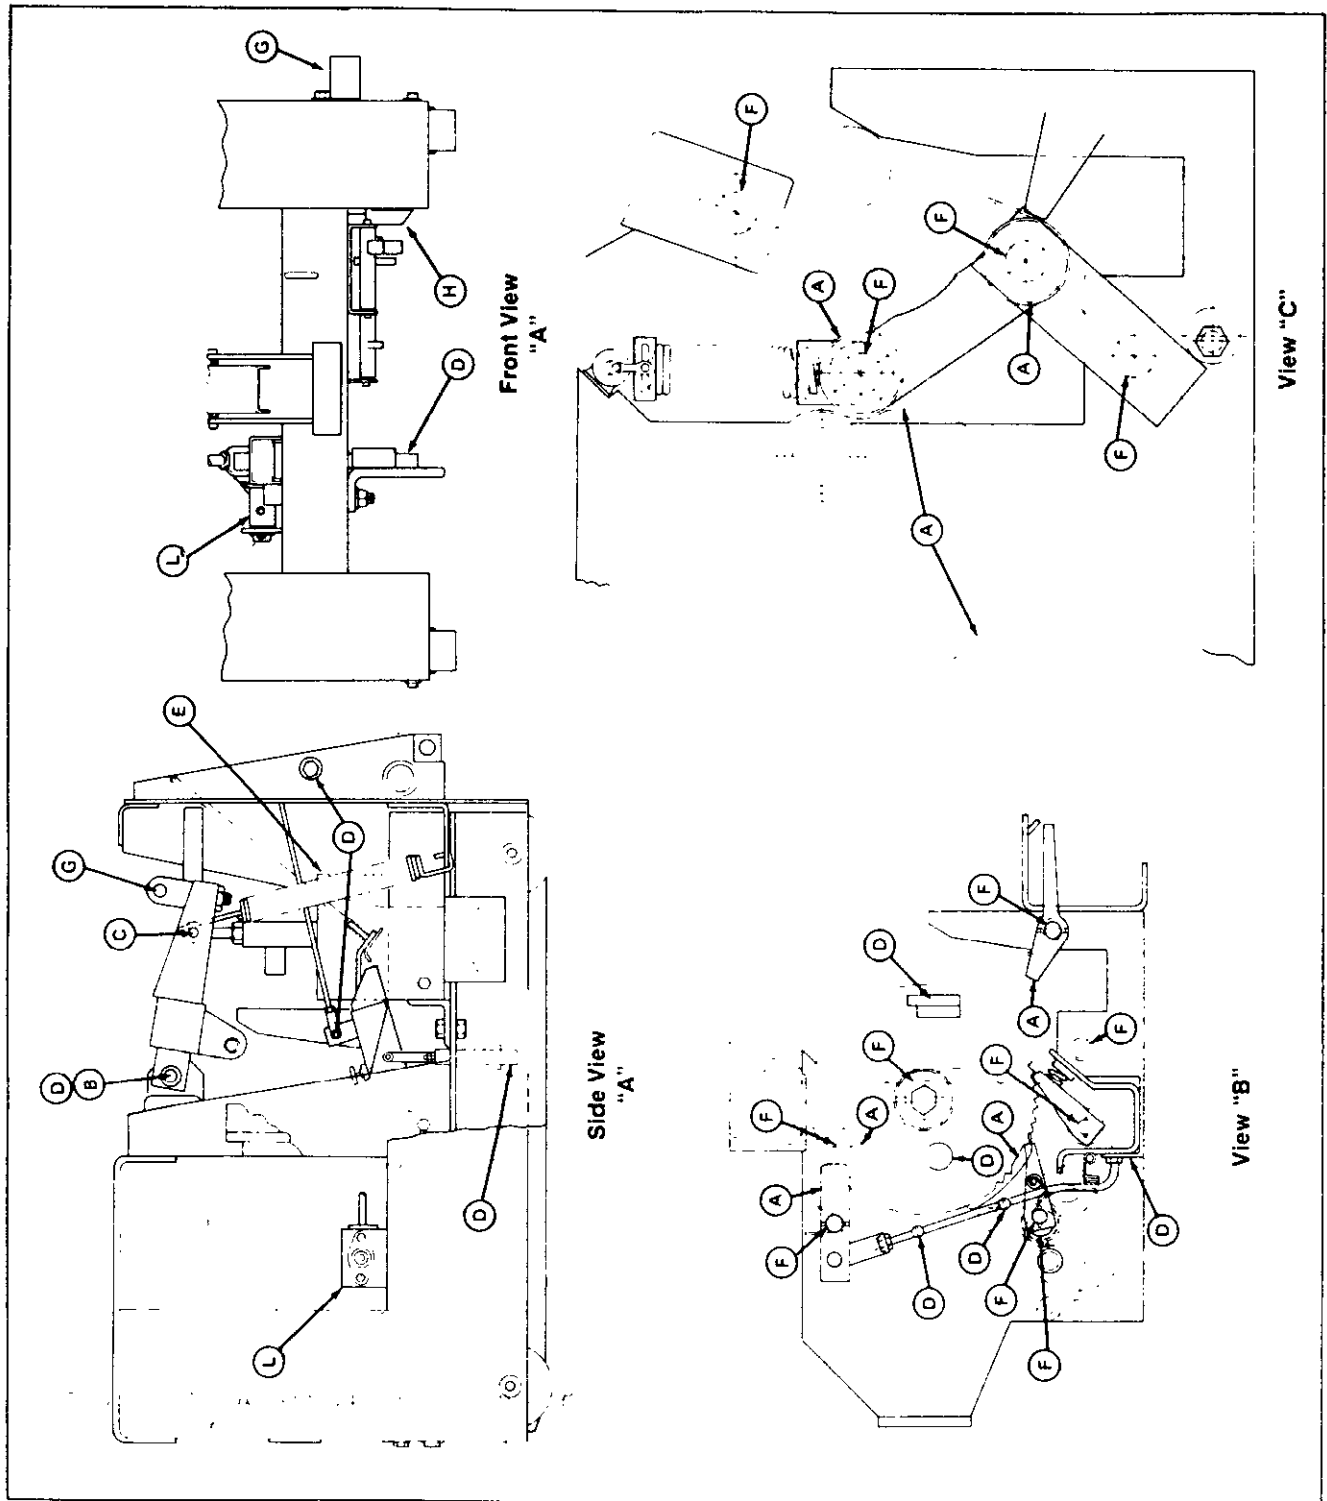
Lubrication Points on Frame and Operator (View A) Drive Assembly (View B) and Linkage Assembly (View C)
